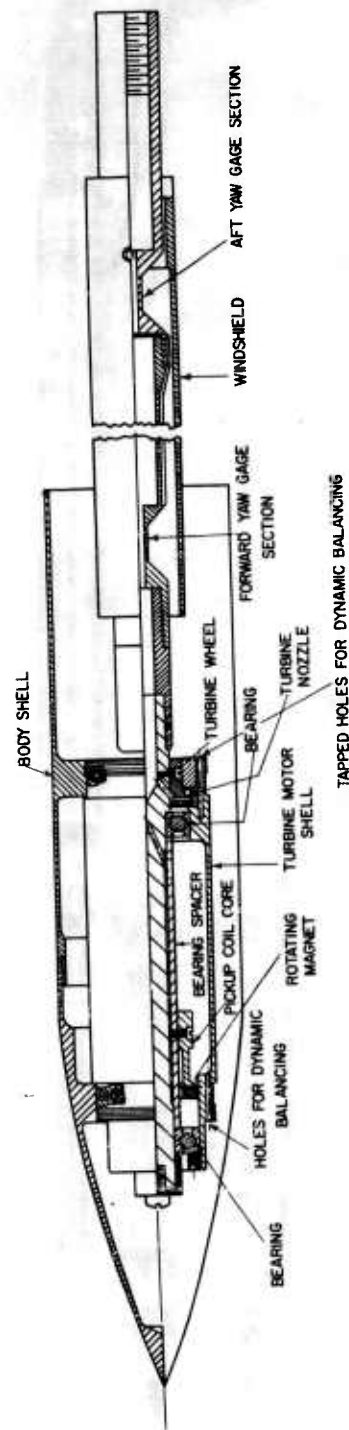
ASSEMBLY DRAWING OF THE MODEL-AIR TURBINE UNIT
